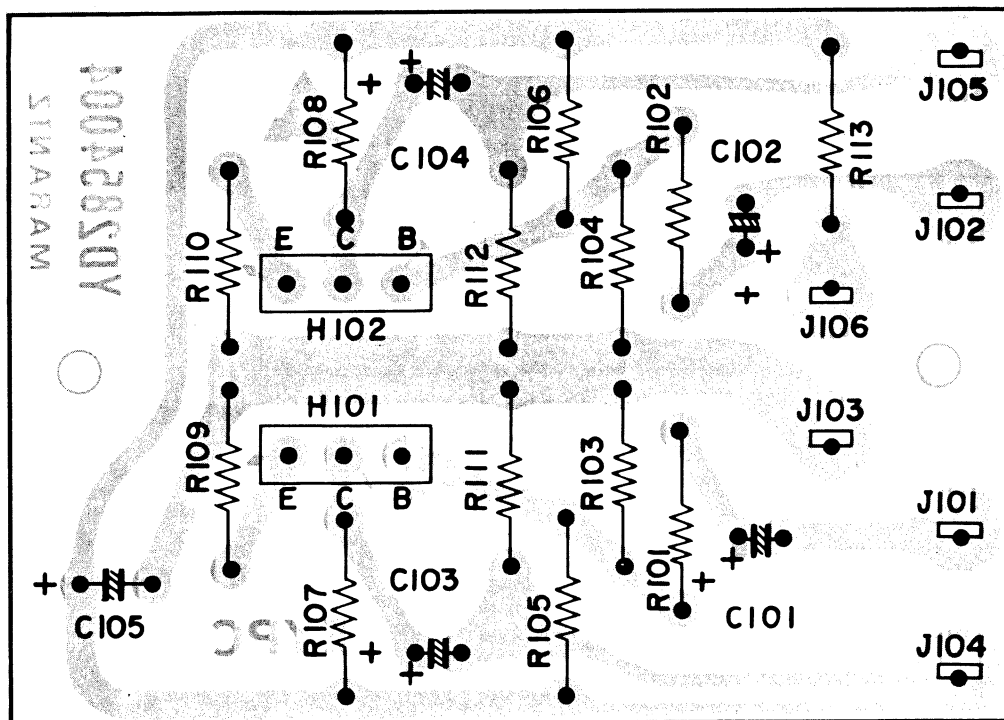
Front Channel Buffer Amplifier Assembly P100 Component Locations
